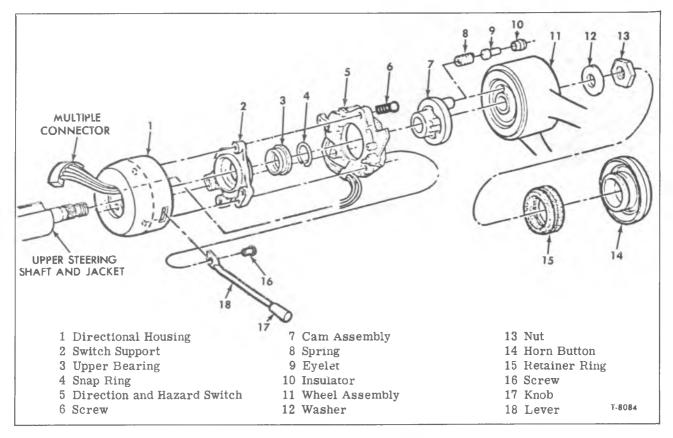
Steering Wheel, Hazard Warning, and Directional Signal Components
